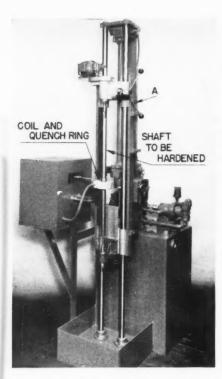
A progressive feed unit used for hardening steel shafts up to approximately three feet in length.
